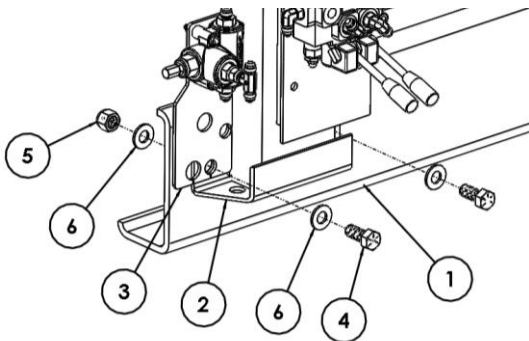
FULLY HYDRAULIC FRAME INSTALLATION
